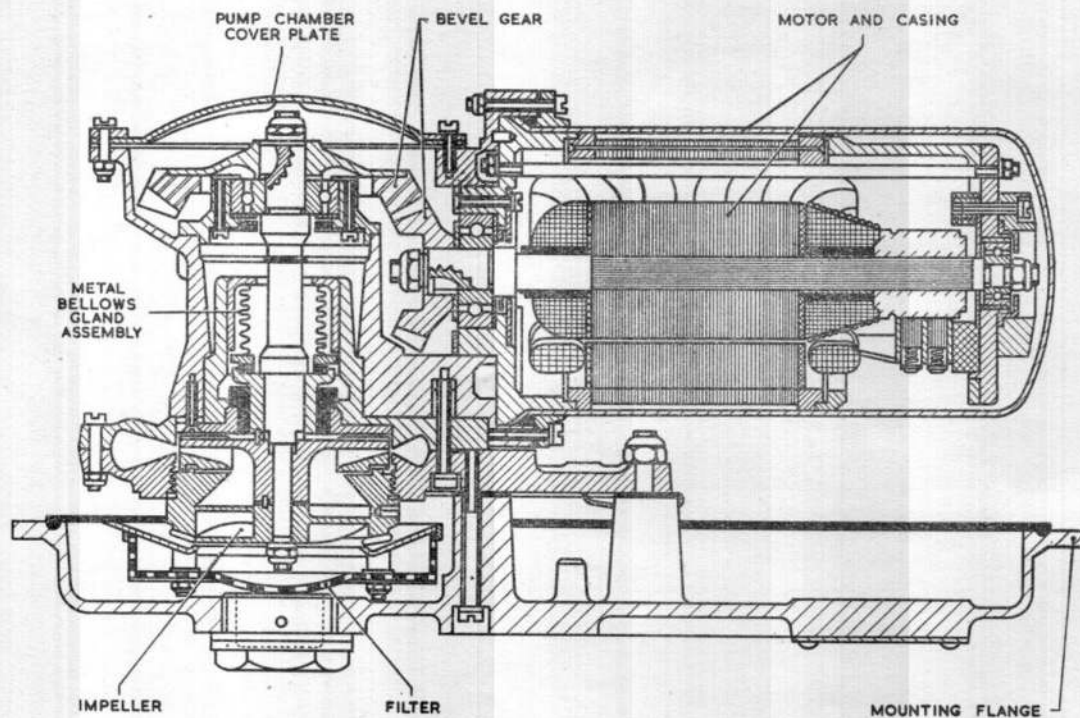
Sectional view of bottom sump mounting type fuel pump with right angled drive
